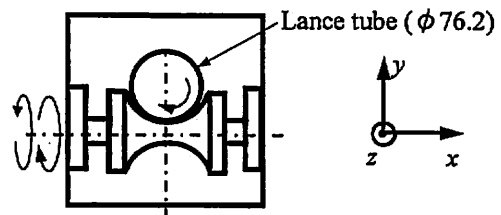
Lance bearing (radial clearance = 1.9 mm)
